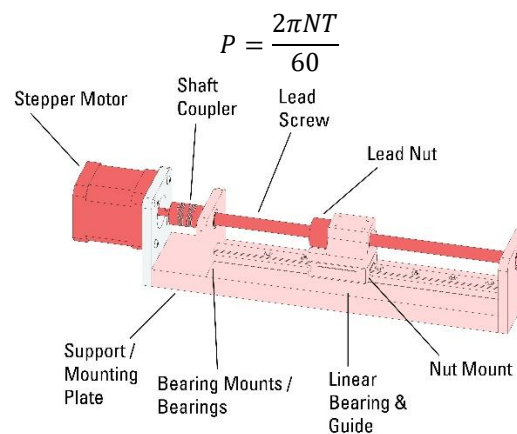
Screw Driven Compaction Mechanism with Motor and Guide Rails
